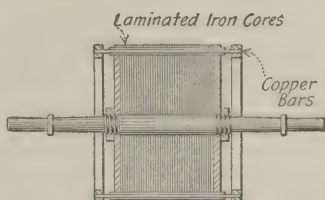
SECTIONAL VIEW OF SQUIRREL-CAGE ROTOR
